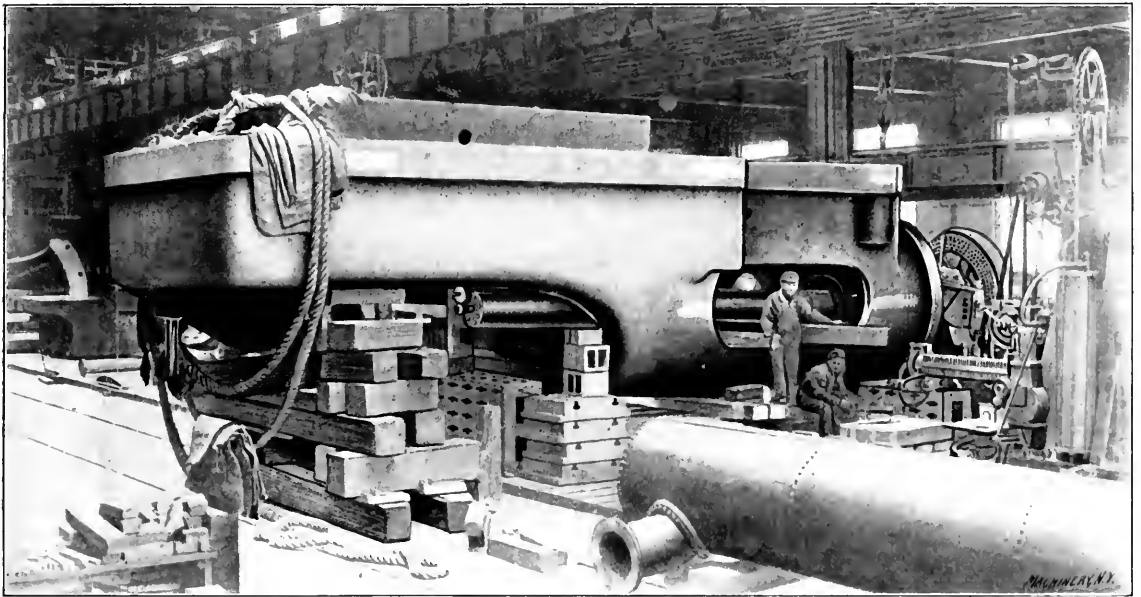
Facing, Boring and Drilling Machine, shown also in Fig. 6, Finishing the Cylinder End of a massive Rolling Mill Engine Frame. The Casting weighed 105 Tons.
